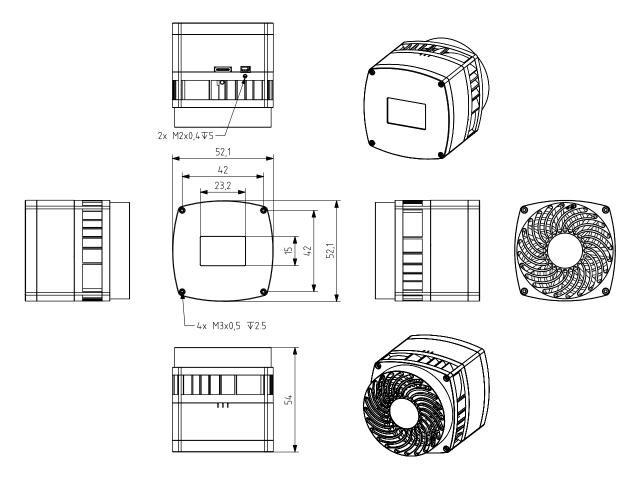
Dimensional drawing of MJ150XR-GP-FA-GO
